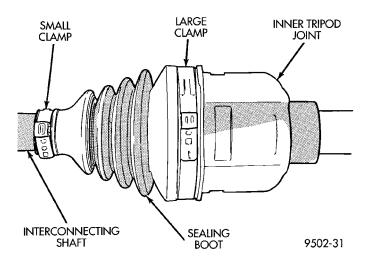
Inner Tripod Joint Sealing Boot Clamps
